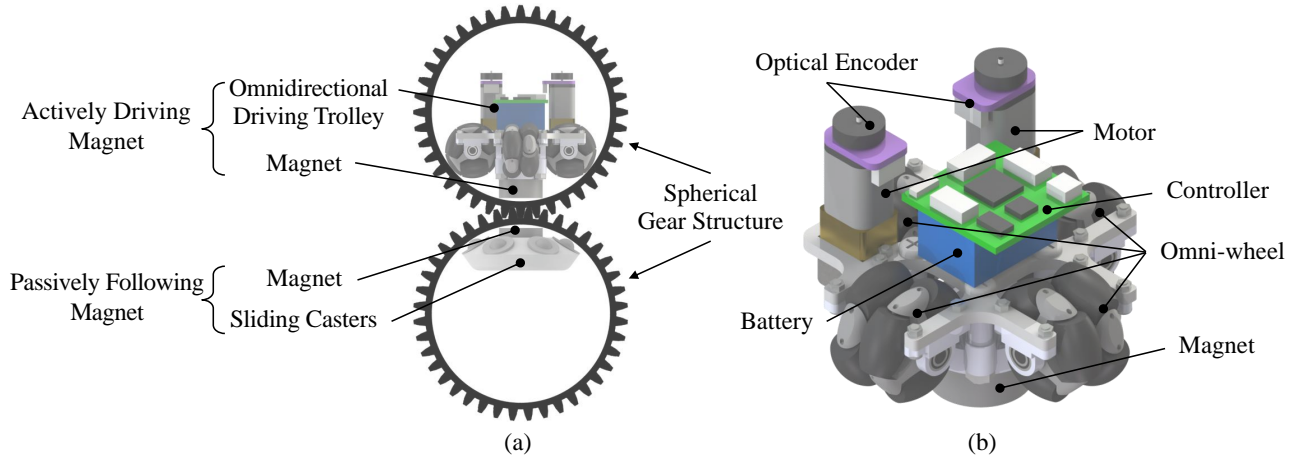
(a) The proposed omnidirectional internal drive consists of an actively driving magnet and a passively following magnet, where the active-passive magnet pair hold a magnetic connection across the spherical gear surface; (b) The actively driving magnet is an integrated omnidirectional trolley with four omnidirectional wheels and a permanent magnet at the bottom.
